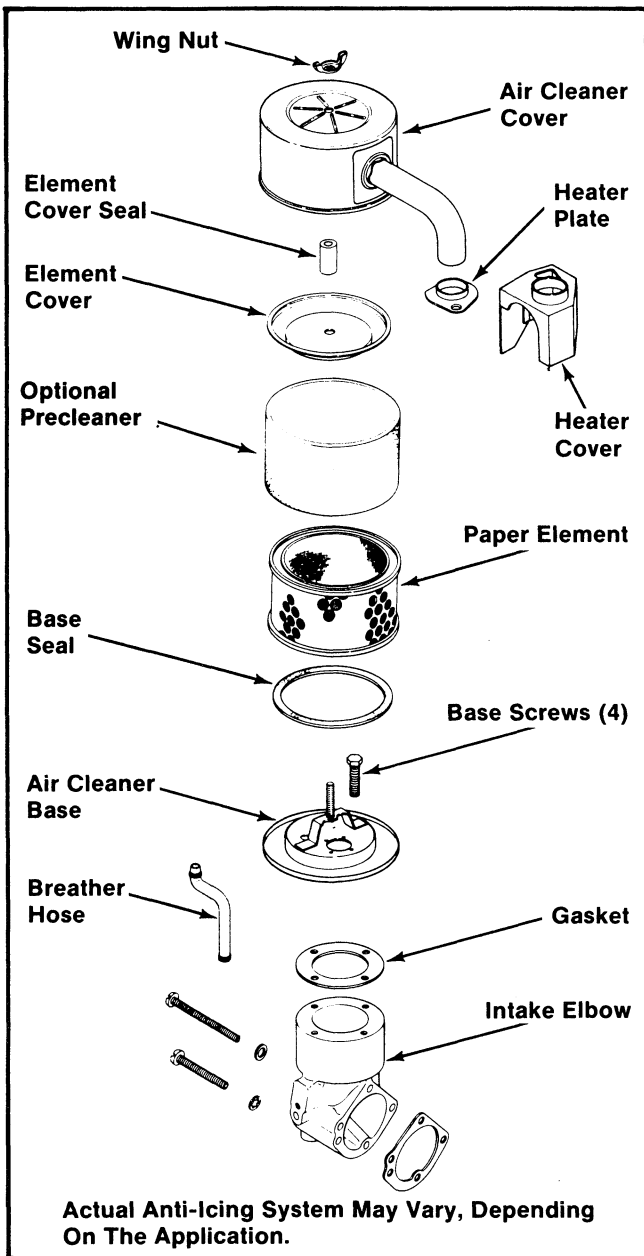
Anti-Icing Air Cleaner Assembly.
